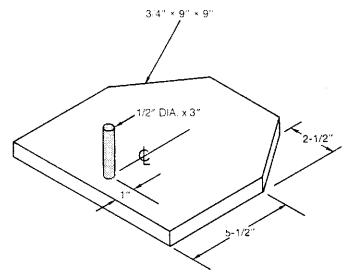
Construction details of a guide for sanding curved workpieces to a uniform width.
